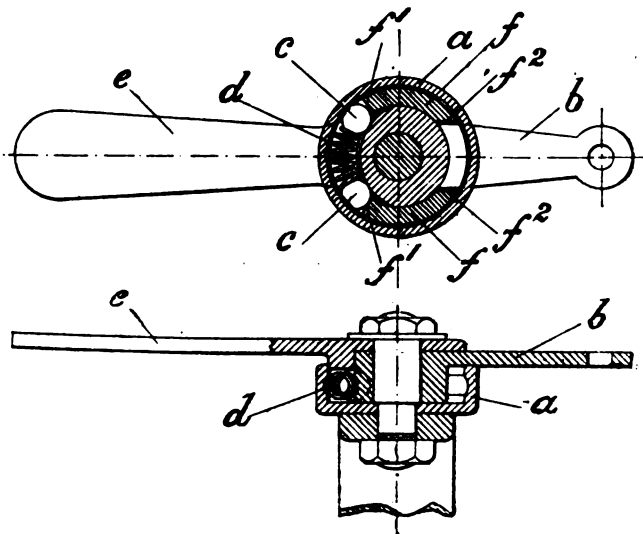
Part Sectional Elevation and Plan of "Autoloc."
